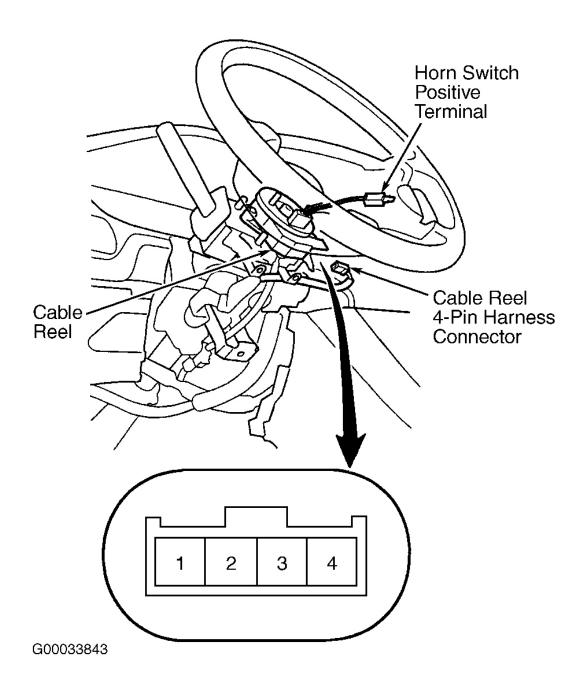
Identifying Cable Reel & Horn Switch Connectors (3.2TL Shown; MDX Is Similar) Courtesy of AMERICAN HONDA MOTOR CO., INC.
